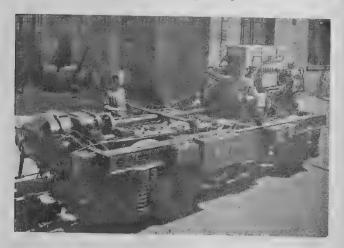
Power bogie of the Ganz railcars containing the main parts of the machinery equipment.
